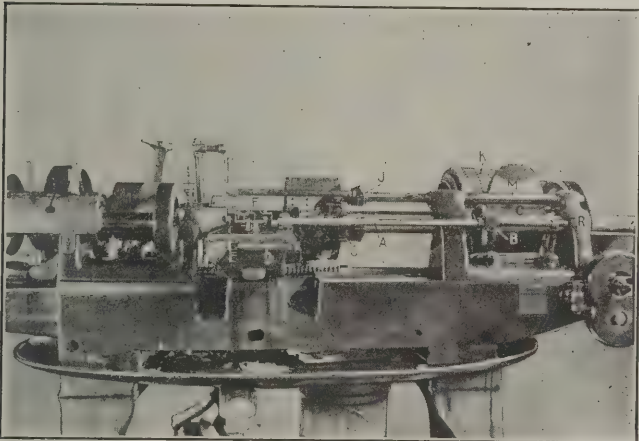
Turning a Multiple Shoulder Shaft on the Cleveland Plain Automatic
